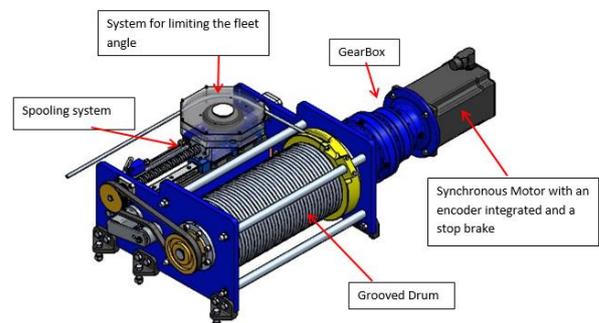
CAD view of the VICINAY Winch WB21.L.30S.1
